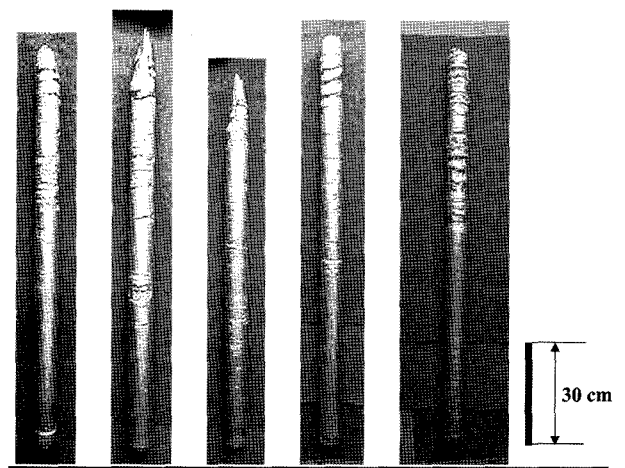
Billets with a diameter of 3 inch, which manufactured by continuous casting.
